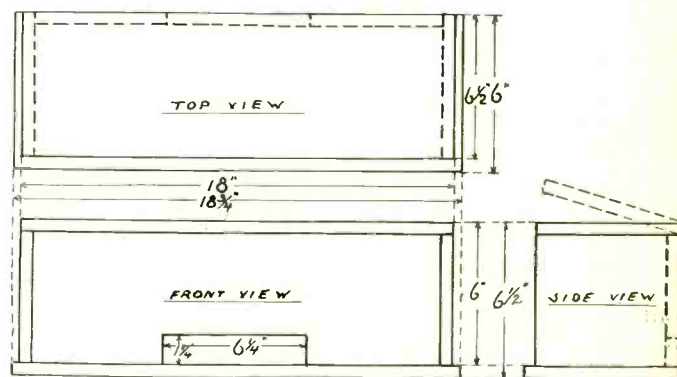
Dimensions for constructing the cabinet for the receiver described herewith.
